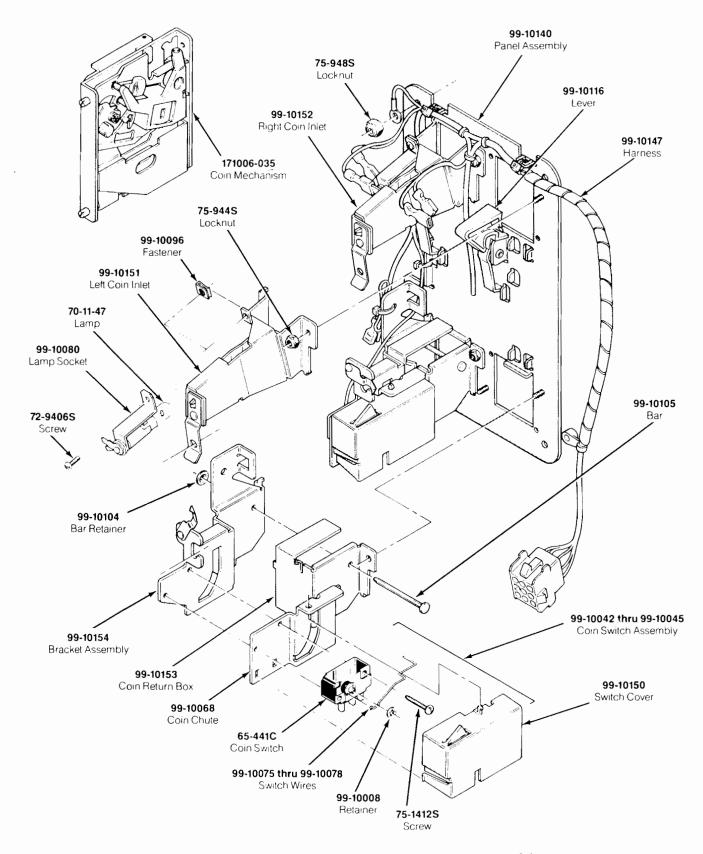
Coin Acceptors, Inc. Coin Door Assembly 171027-001 A
